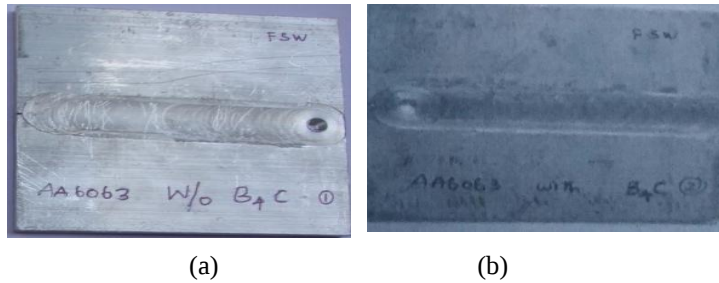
(a) FSW without B₄C (b) FSW with B₄C
